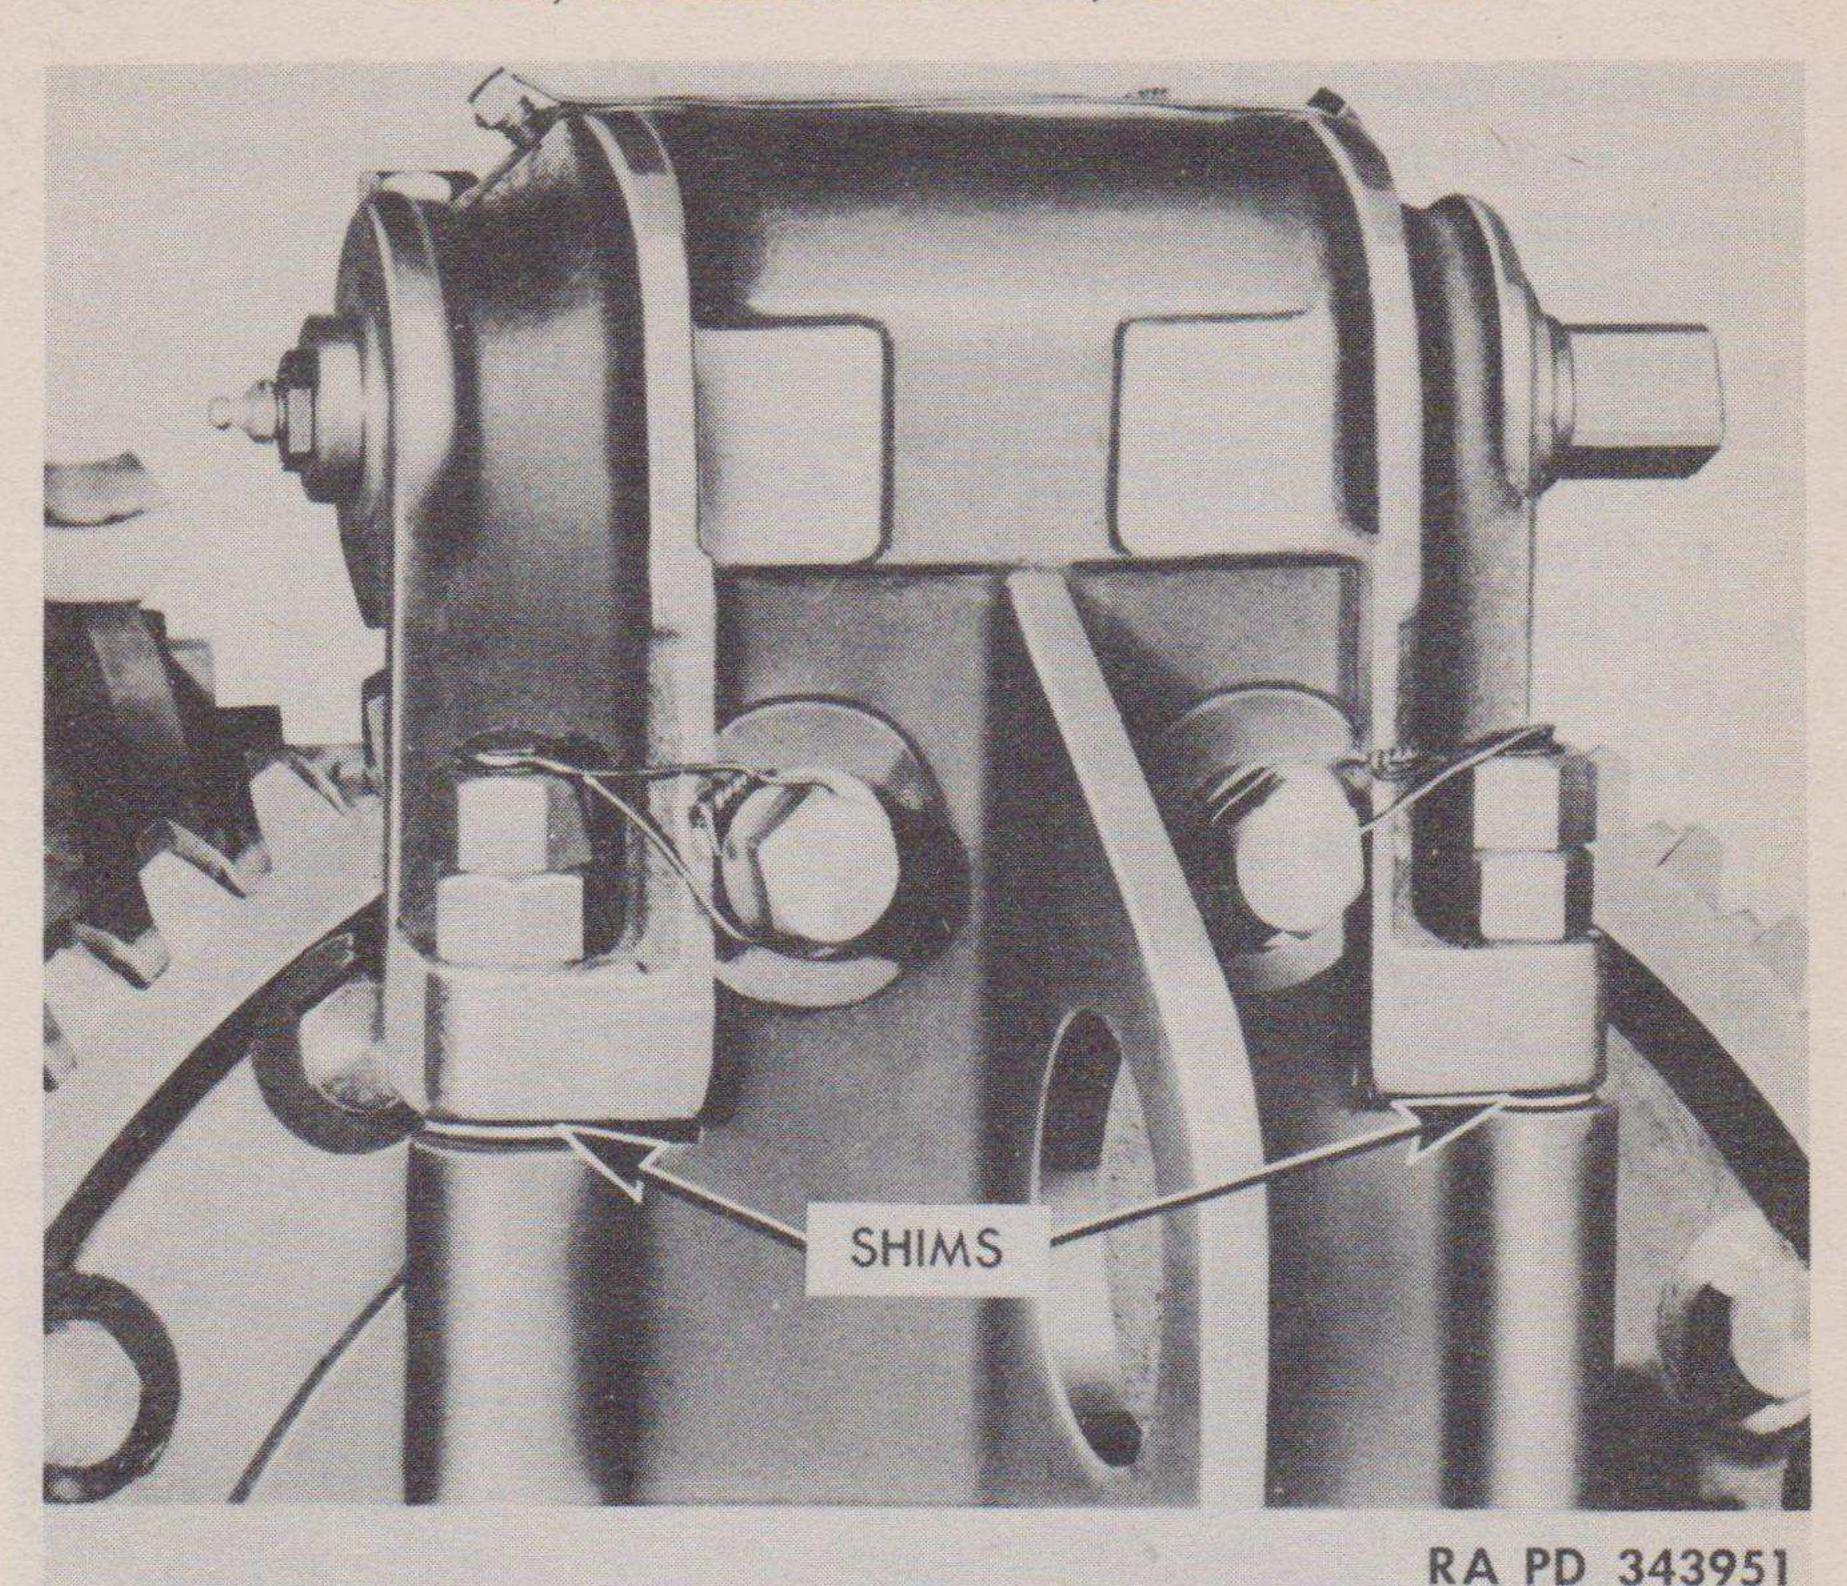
Leveling Worm to Worm Wheel Adjusting Shims
